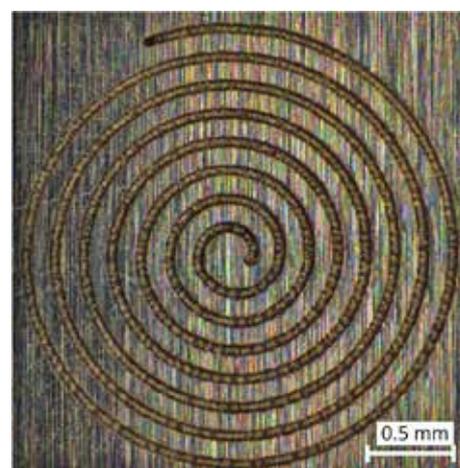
Example weld between a glass (BK7) and a metal (aluminium: Al 6082). The weld is in the shape of a spiral, with a pitch of 156 μm and an outer diameter of 2.5mm.
